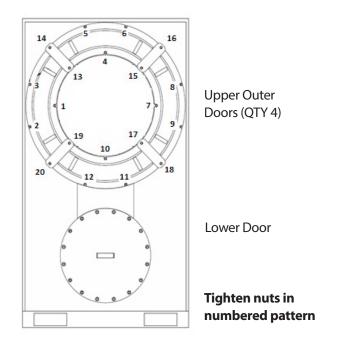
VERIFYING TORQUE SETTINGS (FRONT VIEW, PANELS REMOVED) VTG-6000
